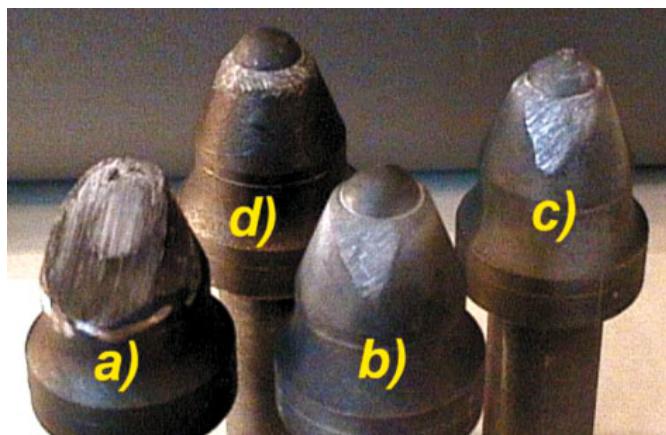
A view of tools edges after mining tests: a) without assistance, b) with assistance from the front, c) with assistance from rear, d) in lubricated holder
